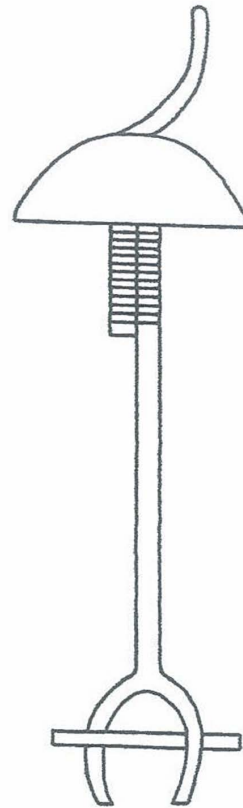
An 18th Dynasty representation of the stone vessel drilling and boring tool
